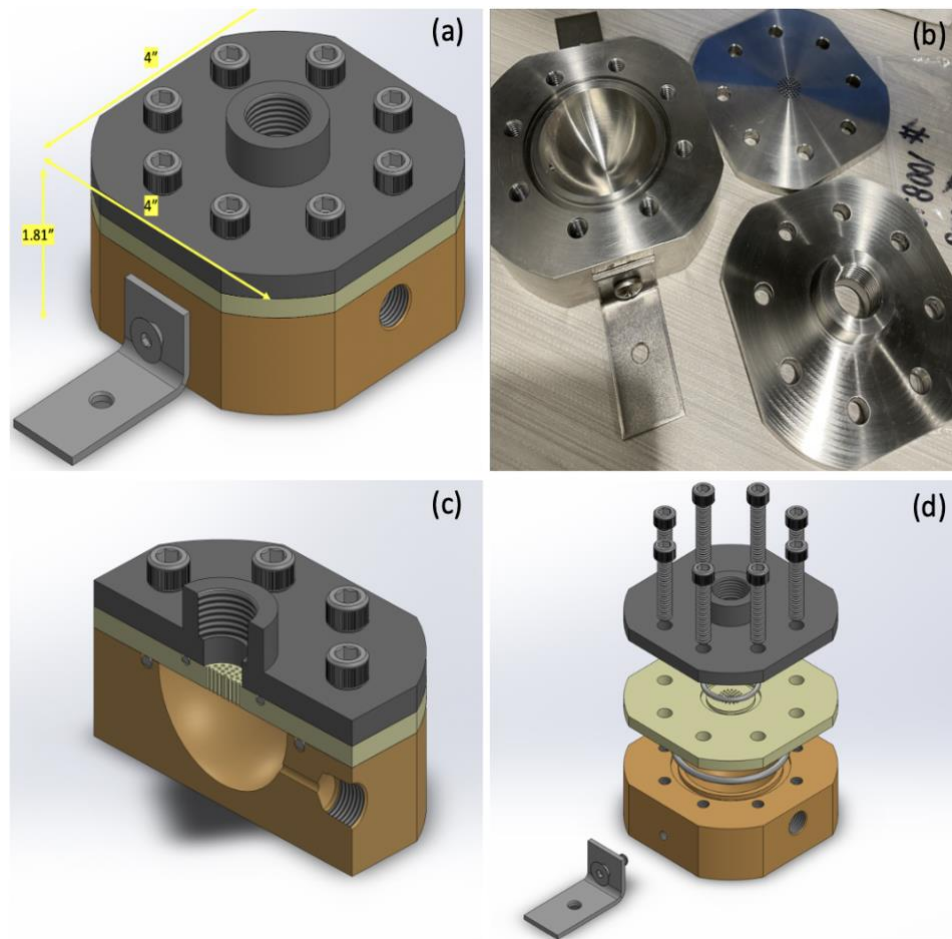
(a) CAD drawing of the injector, (b) The actual appearance of the injector, (c) Cross-sectional CAD drawing of the injector, (d) Exploded view of the injector.
